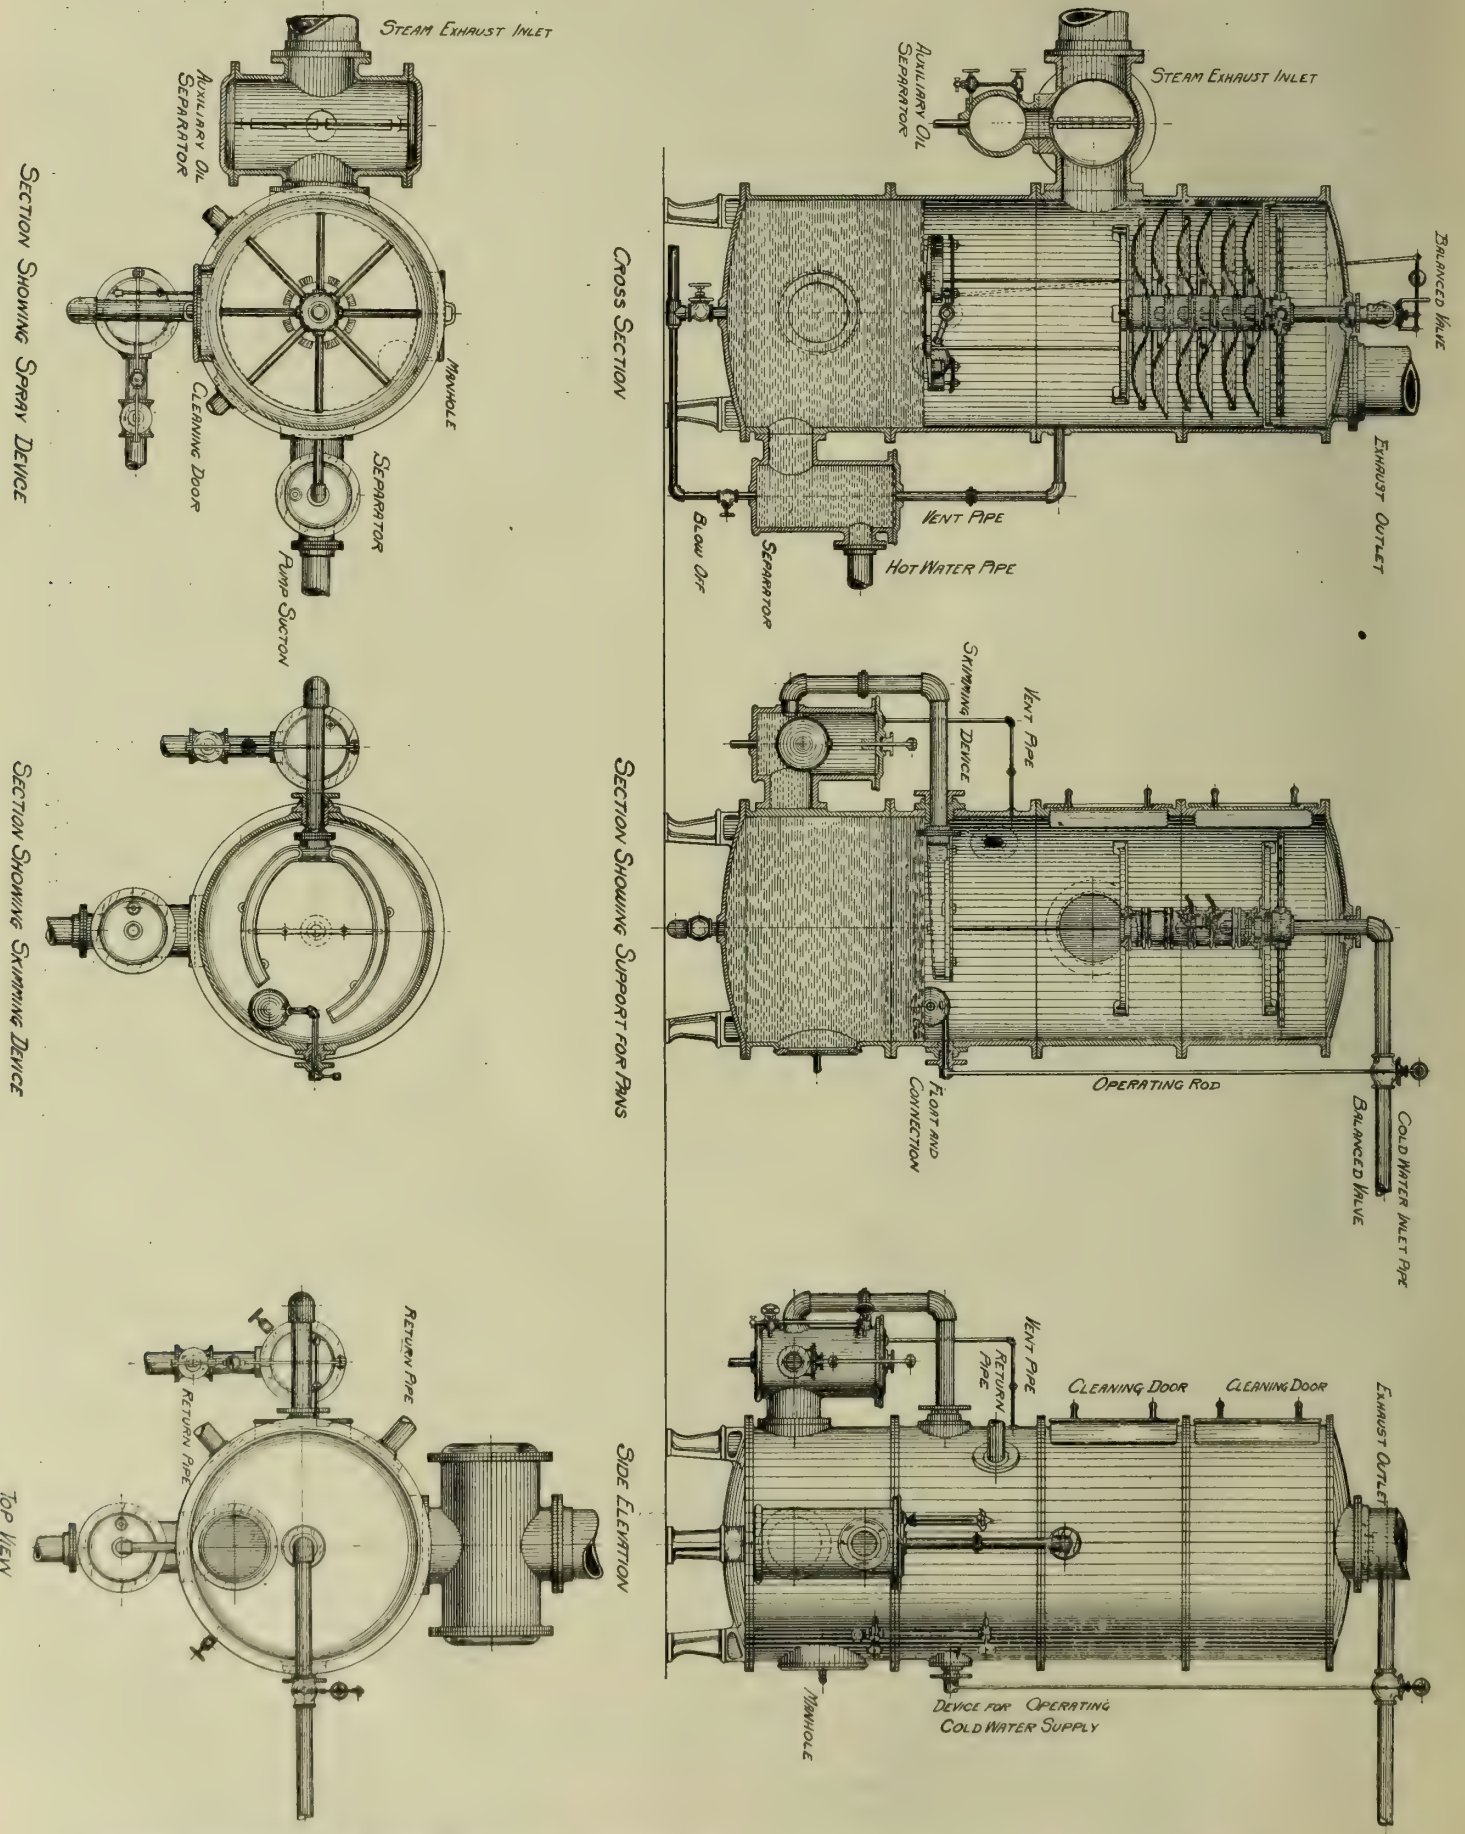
Feed Water Heater Purifier and Receiver, Showing Auxiliary Oil Separator on Exhaust Inlet.
